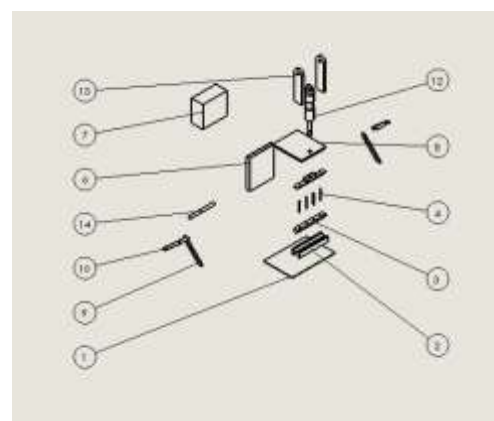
Drafting Assembly Exploded Views of Mini Hydraulic press Machine
